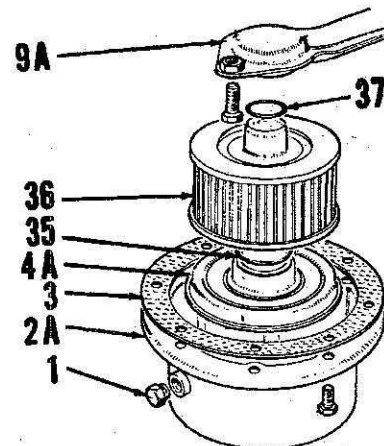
Exploded view of late type full flow pump intake filter, suction screen and cover. Refer to Fig. 175 for earlier type unit used with by-pass type filter.
